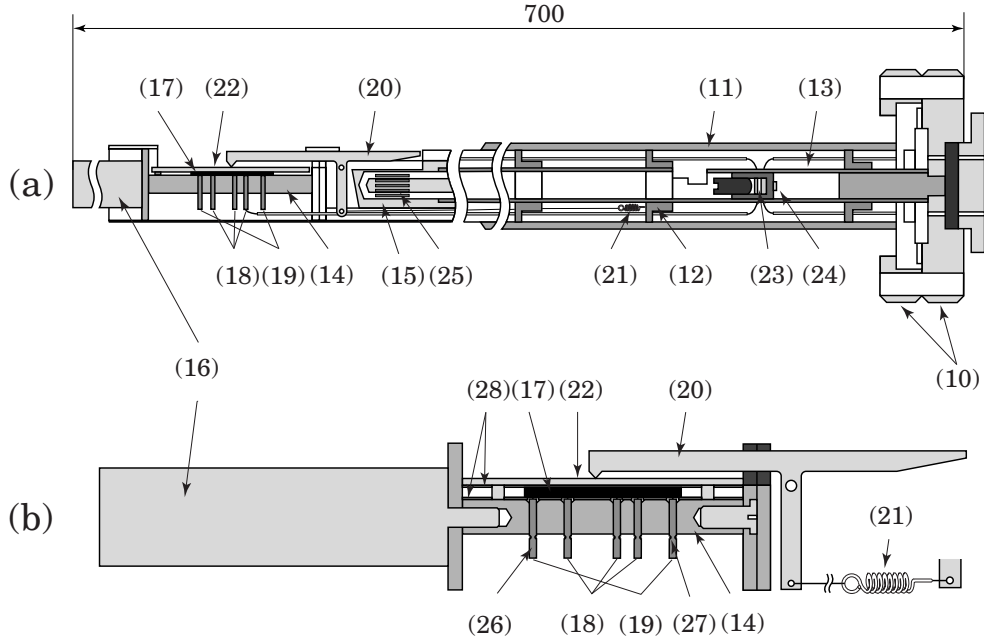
(a) General design of sample holder. (b) Detailed drawing of sample holder.
